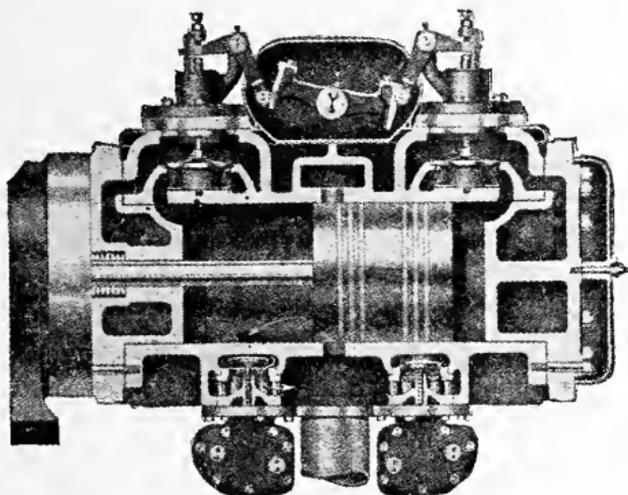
Section of Unaflow Engine Showing Central Exhaust Ports Closed and Exhaust Taking Place Through Auxiliary Exhaust Valve on Crank End
